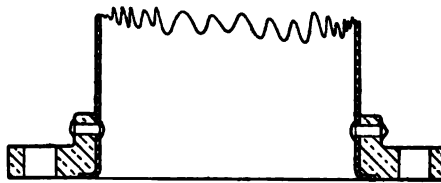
Collar Flange with Edge of Copper Pipe Turned Over.
